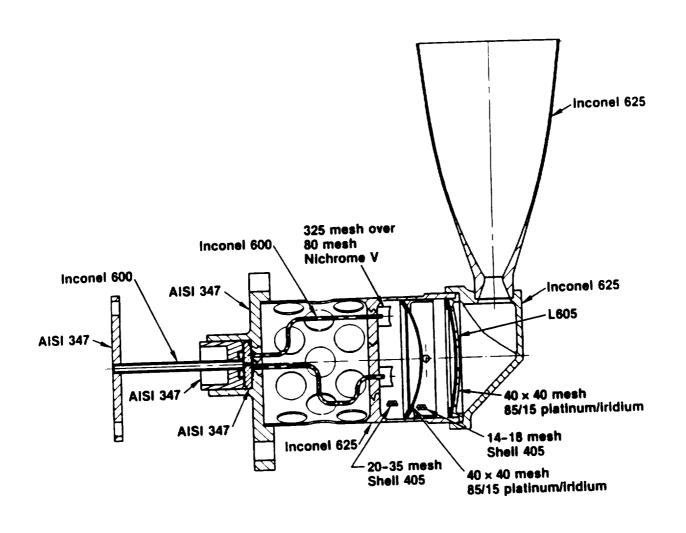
TRMM Thrust Chamber Assembly (TCA)
